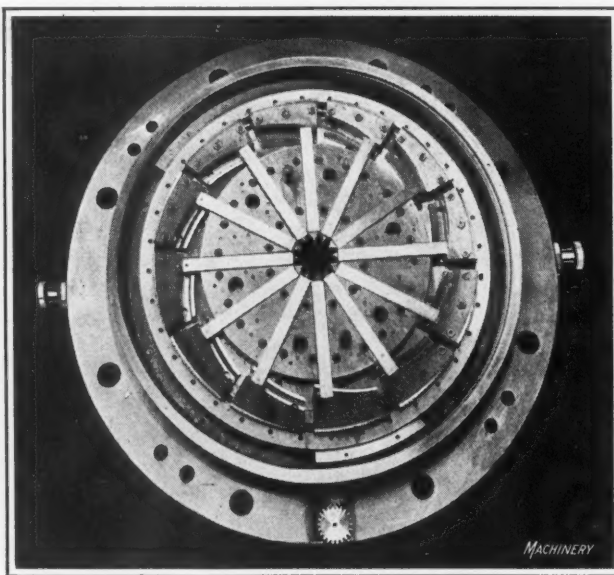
Tool-head with Bottom removed to expose the Tool-actuating Mechanism
